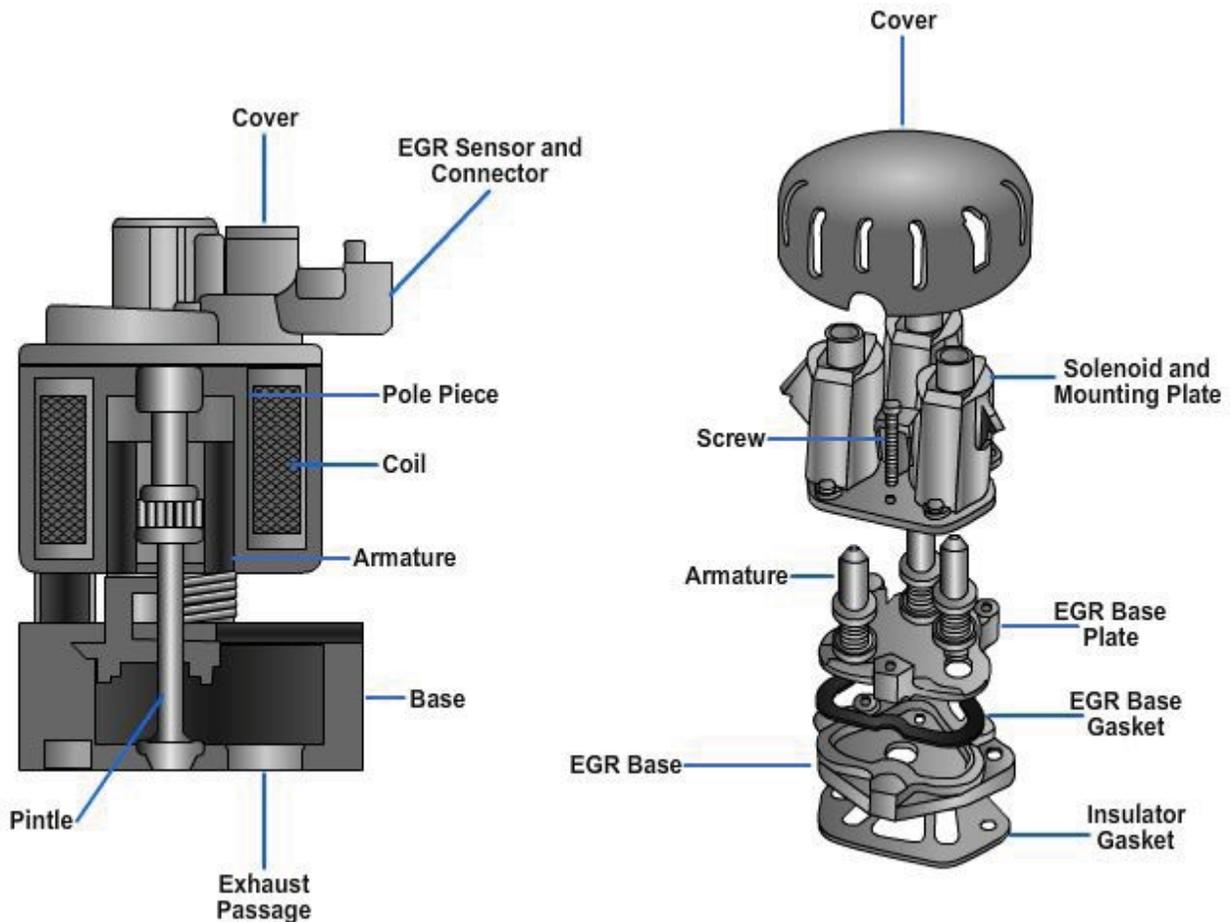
Cutaway view showing components of an electronic or digital EGR valve and a multistage EGR valve that uses three separate solenoids and valves.
